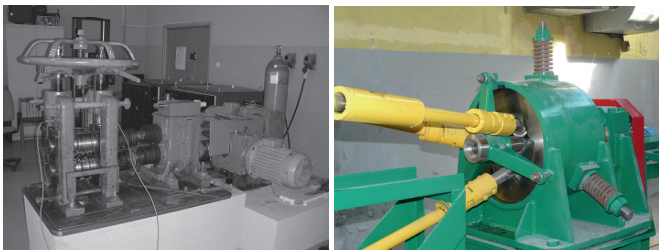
The equipment used for the tests: a) D150 two-high rolling mill, b) three-high skew rolling mill RSP 14/40
